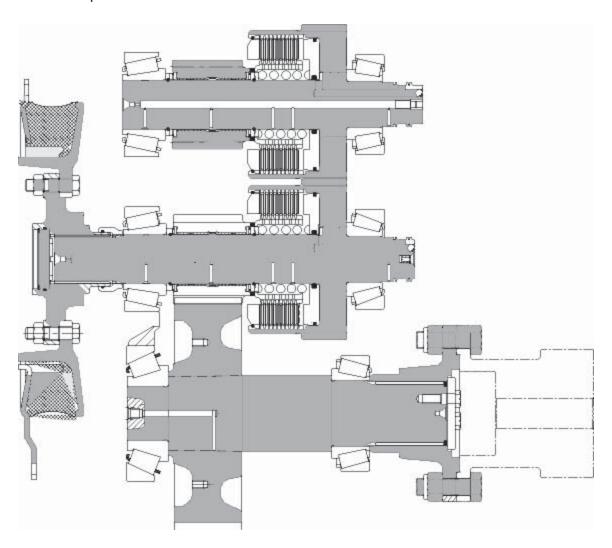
Example of Power Flow with Secondary Clutch Engaged
